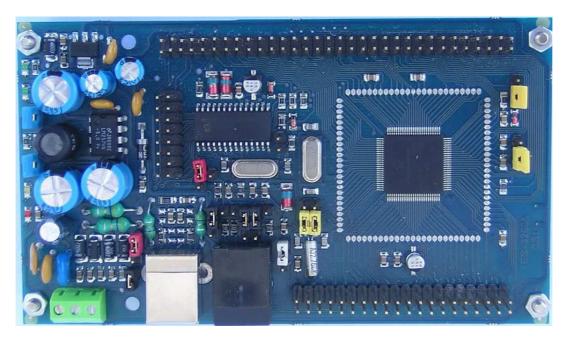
[FLEX003] Jumper settings for programming PIC18
